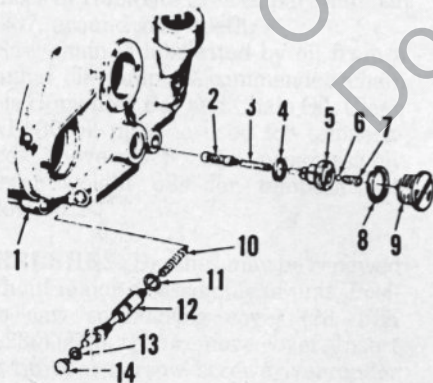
Exploded view of typical manual oil pump assembly.
